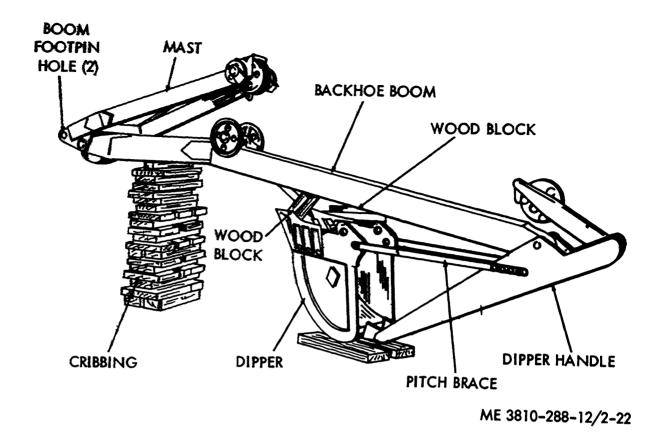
19 Cribbing prepared for backhoe boom assembly installation and removal
